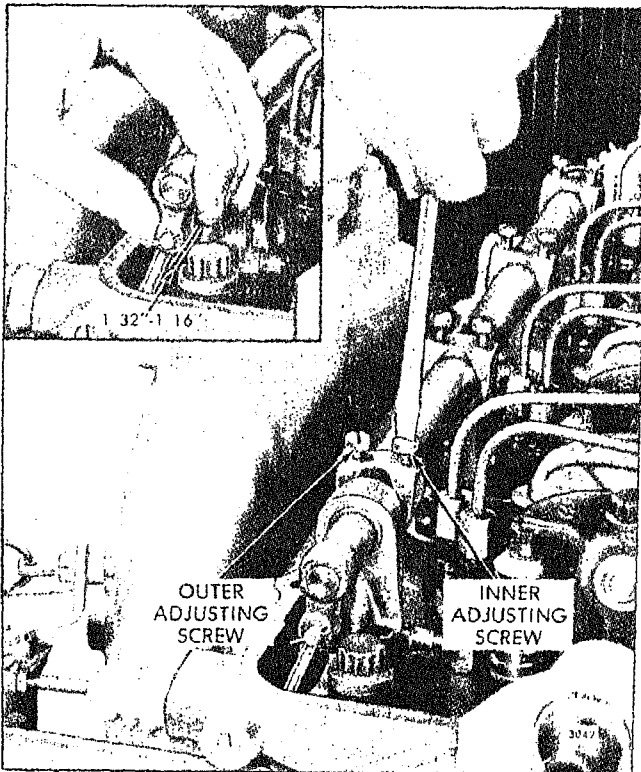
Adjusting Injector Rack Control Lever Adjusting Screws
